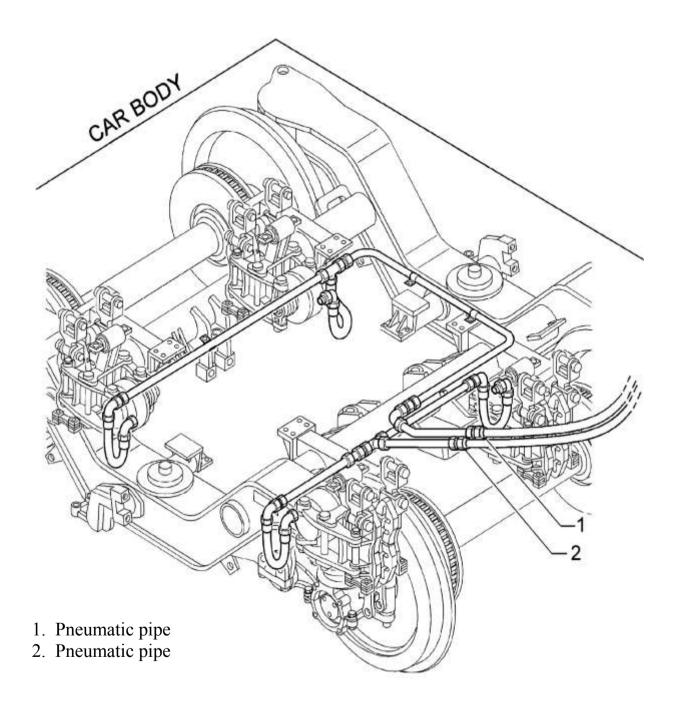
Disconnect Pneumatic Feed Pipes
